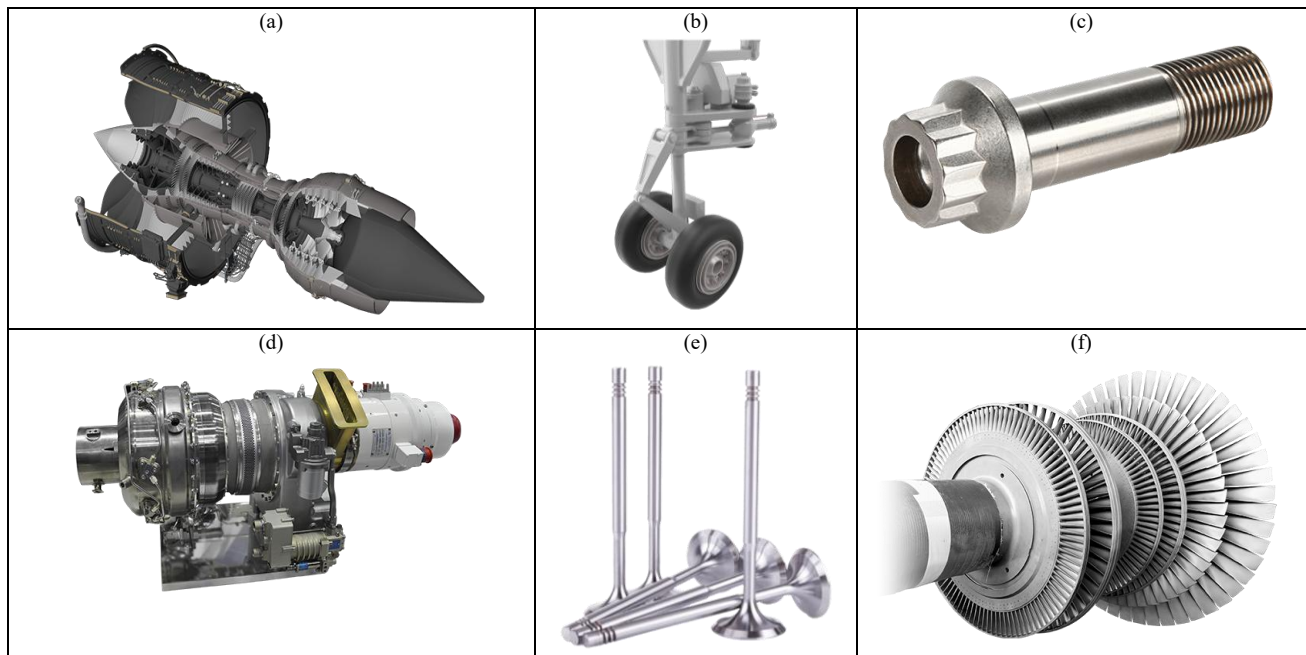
Application of Inconel alloy: (a) Casing, rings, vanes; (b) Landing gear; (c) Airframe fasteners; (d) Generator systems and auxiliary power unit; (e) Engine Valves; (f) Turbine blades and discs [1]
